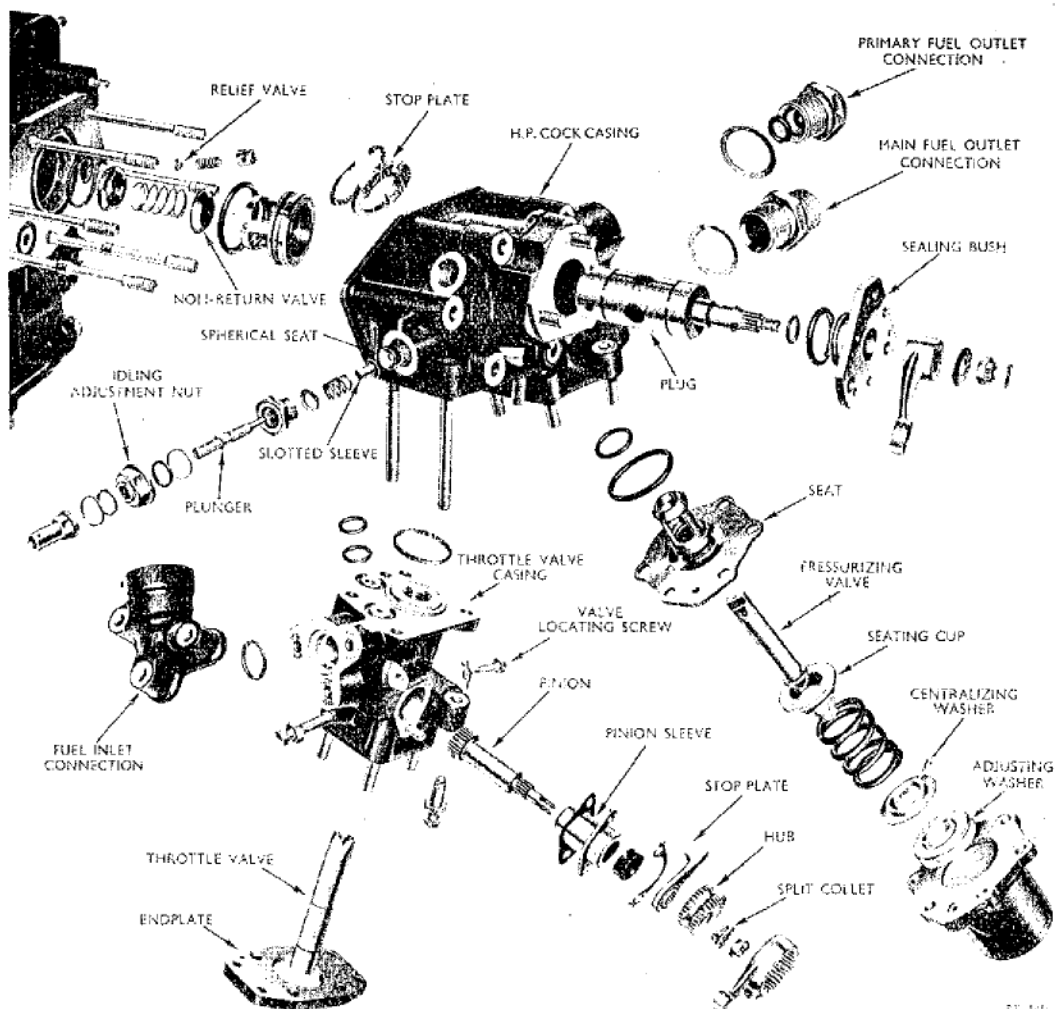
Exploded view of H.P. cock casing (F.C.U. type BA.61076, BA.60351, BA.62403, BA.73323)
